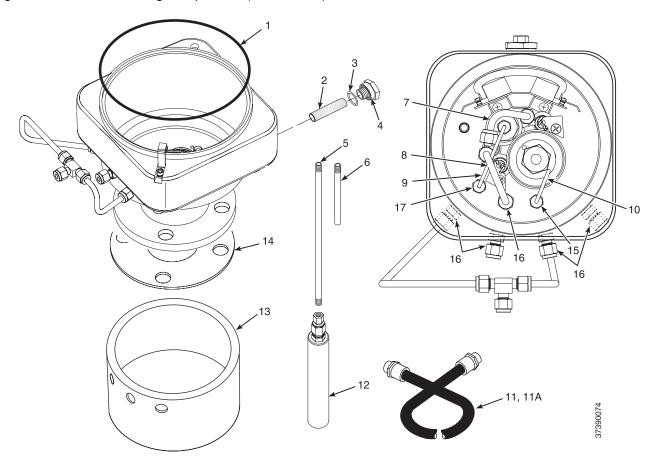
Sensor Housing Components (Sheet 1 of 2)
